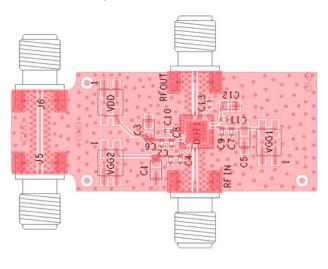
ADL9006-EVALZ Assembly Drawing (J5 and J6 Not Installed)
